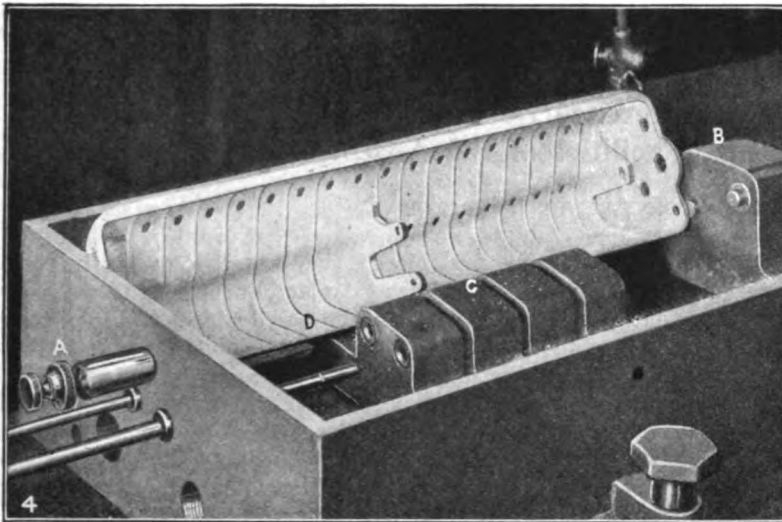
DRILLING THE CENTRAL HOLE. FIG. 5—MILLING EDGE AND FACE OF COVER
